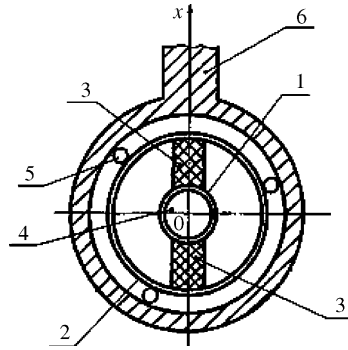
Schematic of the parametric elastic element in the form of a rotating disk: 1 and 2, internal and external rigid rings; 3, elastic elements (springs); 4, rigid solid shaft; 5, bearings; 6, working head of vibromachine.
